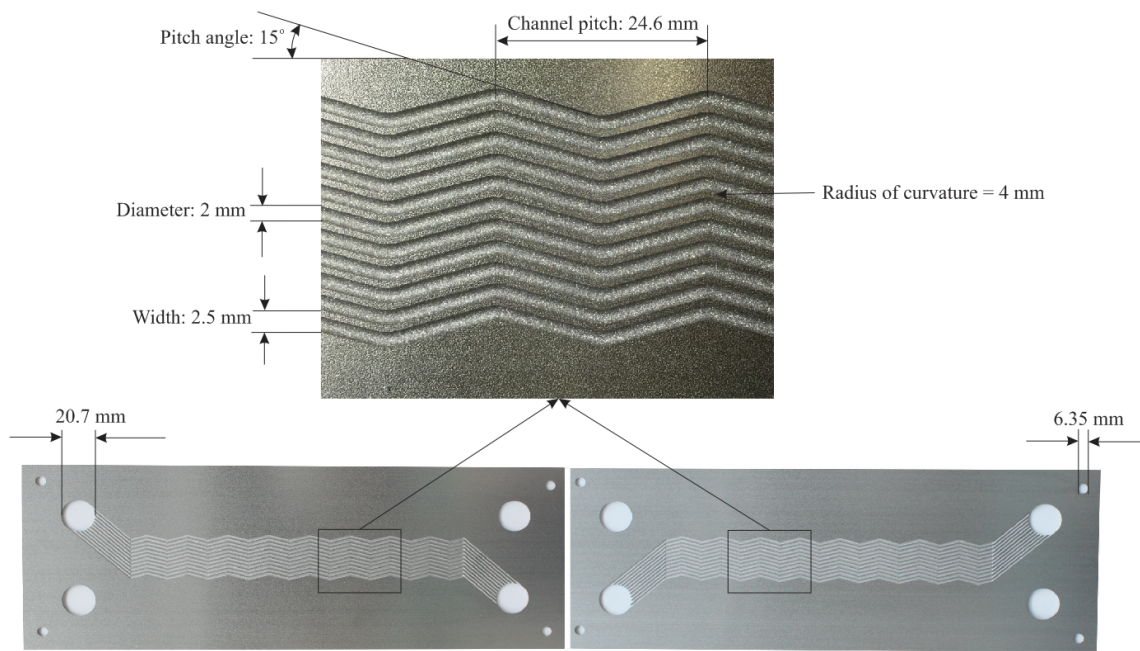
Images of one hot-side plate and one cold-side plate.
